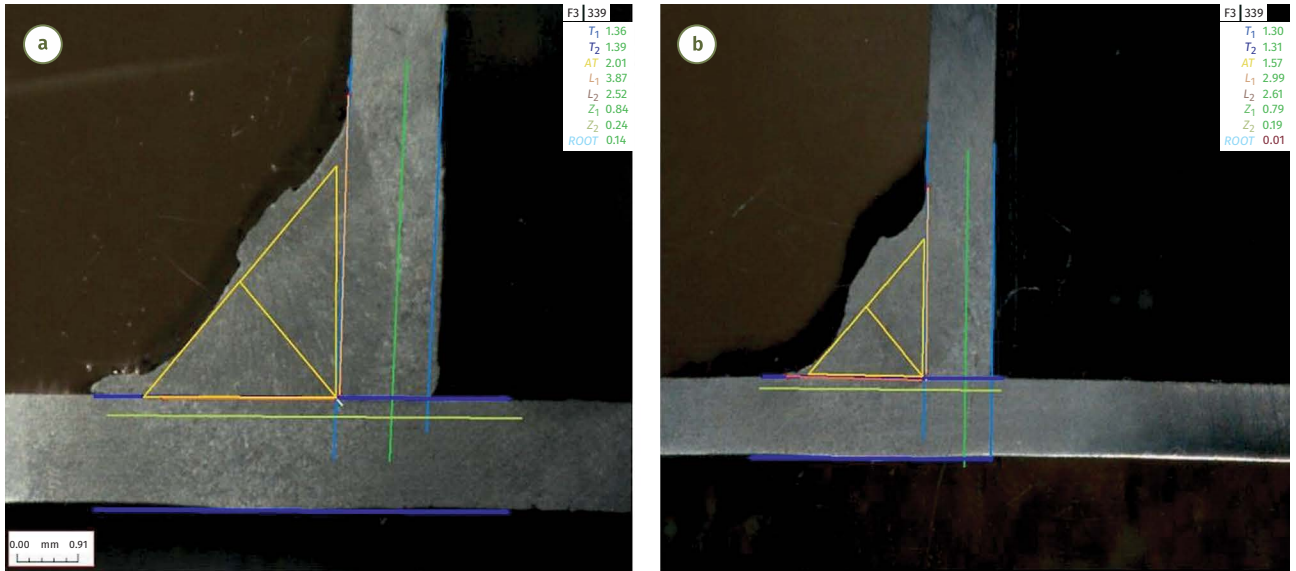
Comparison of satisfactory weld (a) and unsatisfactory weld (b) – weld node 339
